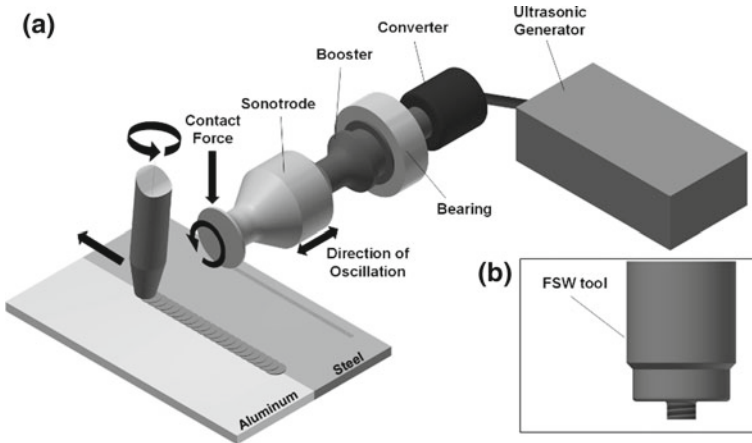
a USE-FSE setup and b used FSW-Tool
